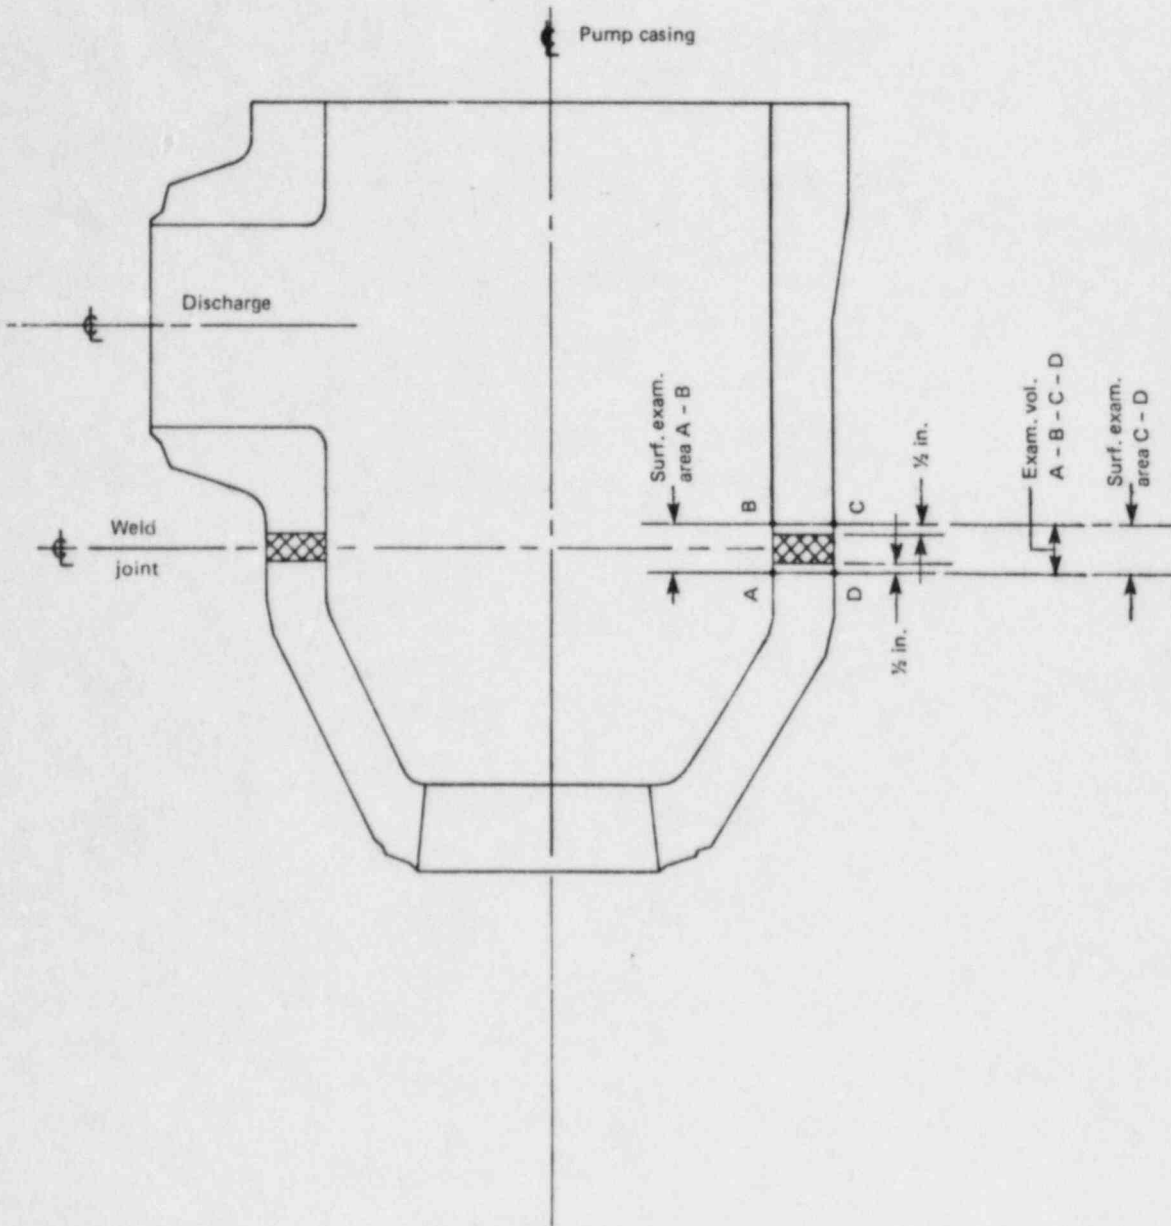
PUMP CASING WELD
